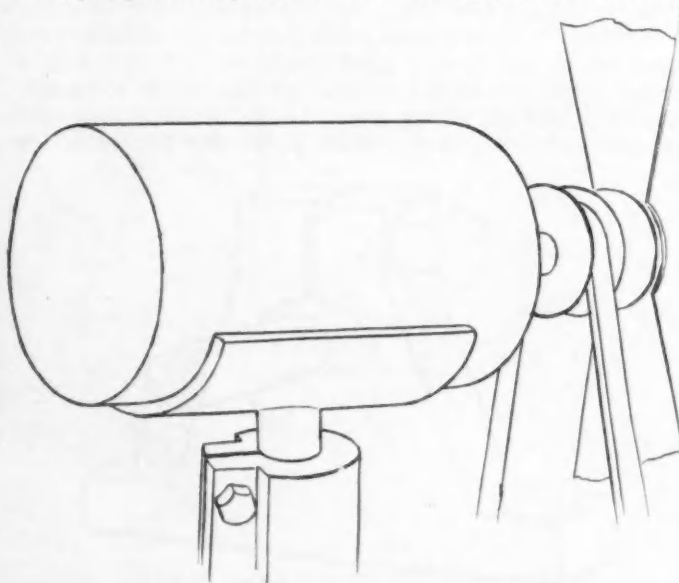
ANOTHER TYPE OF MOUNTING WHICH IS OBJECTIONABLE BECAUSE THE GENERATOR MUST BE HELD IN POSITION EITHER BY HAND OR A SPECIAL TOOL WHILE THE CLAMPING SCREW IS TIGHTENED
